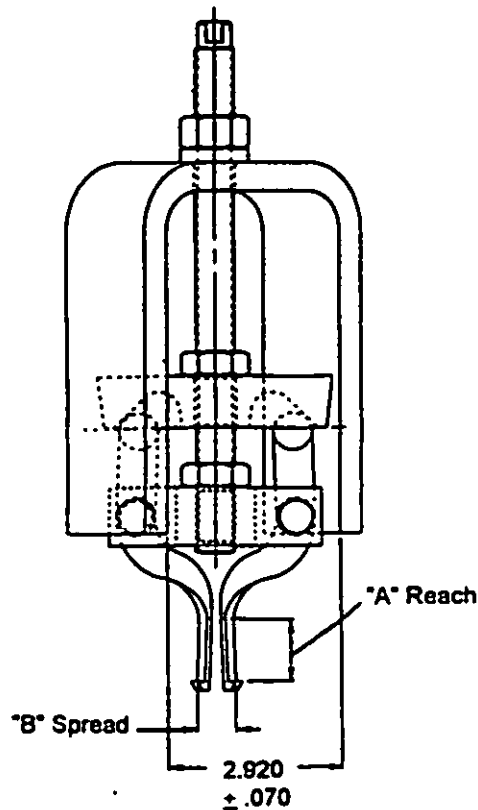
Type IV, puller, mechanical, bearing, clutch pilot.
